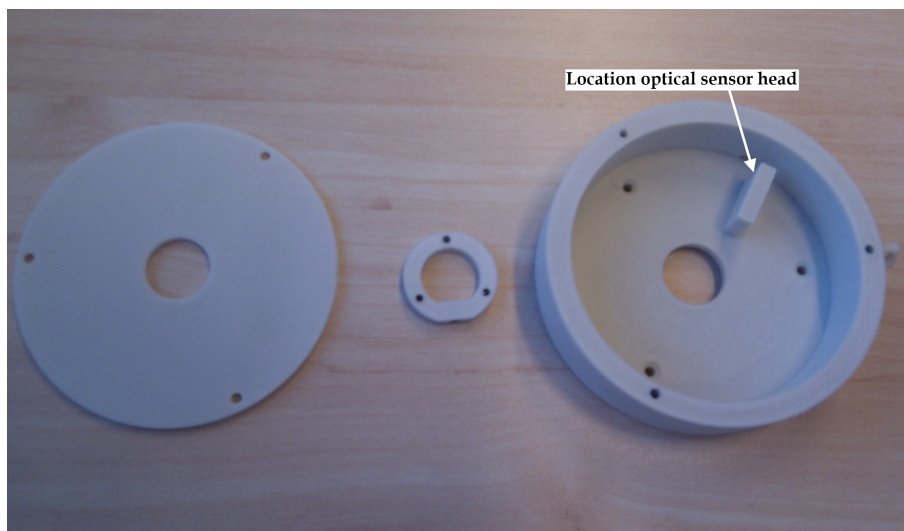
Photo of the position sensor housing. From left to right are seen: the cover, the ring to attach the encoder disc an the base housing.
